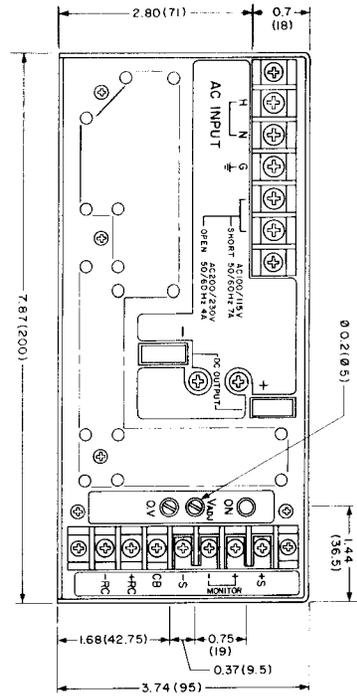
MECHANICAL OUTLINE DRAWING, RBX SERIES, WITH COVER.
